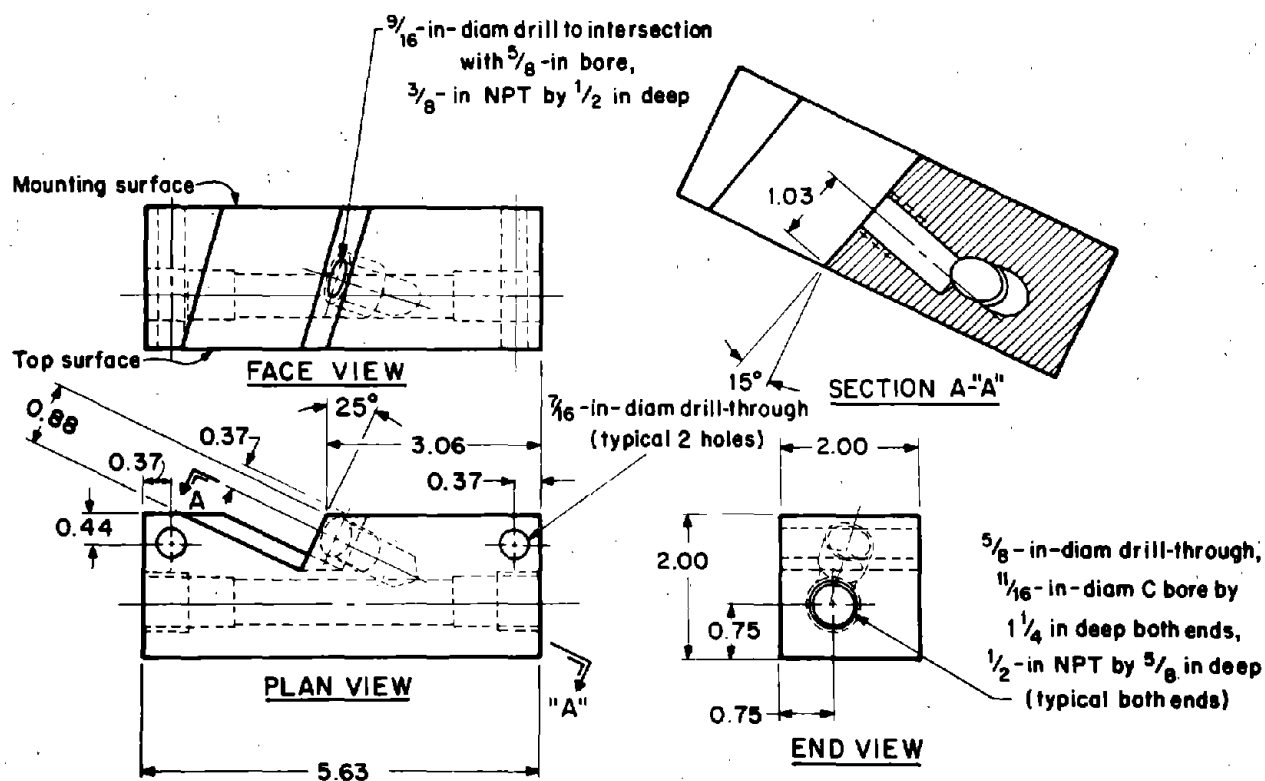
Water spray manifolds 8 and 9. All dimensions are in inches.
